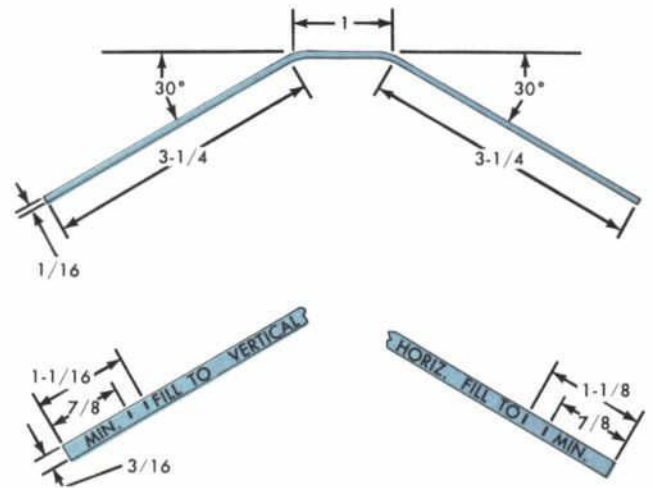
Oil Dipstick for Tecumseh Compressor
